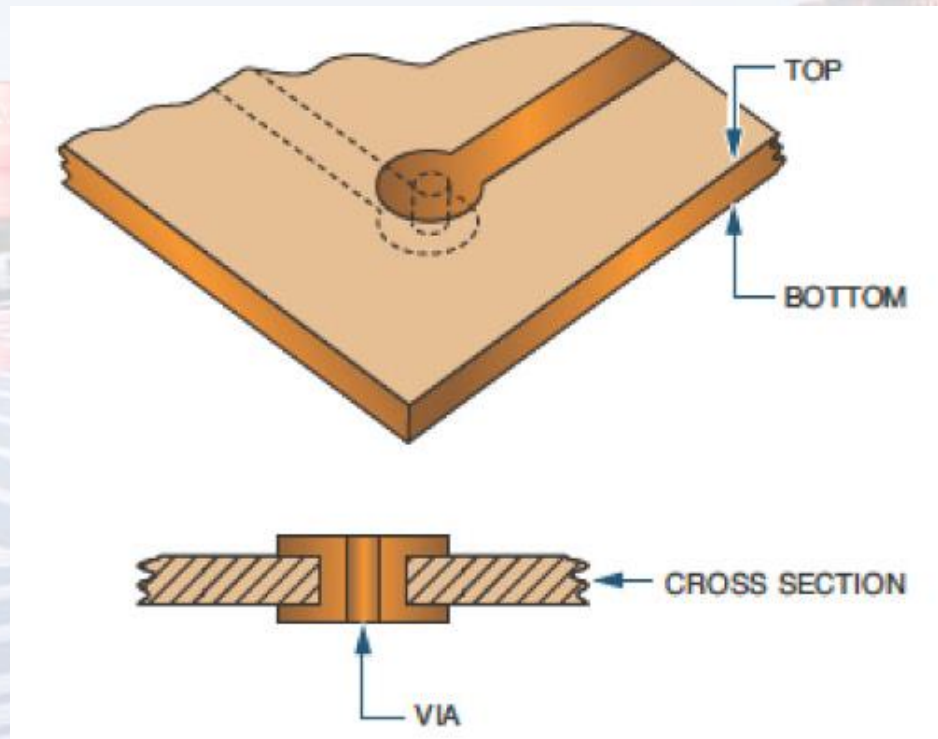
Vias connect the top to the bottom trace of a printed circuit board.
